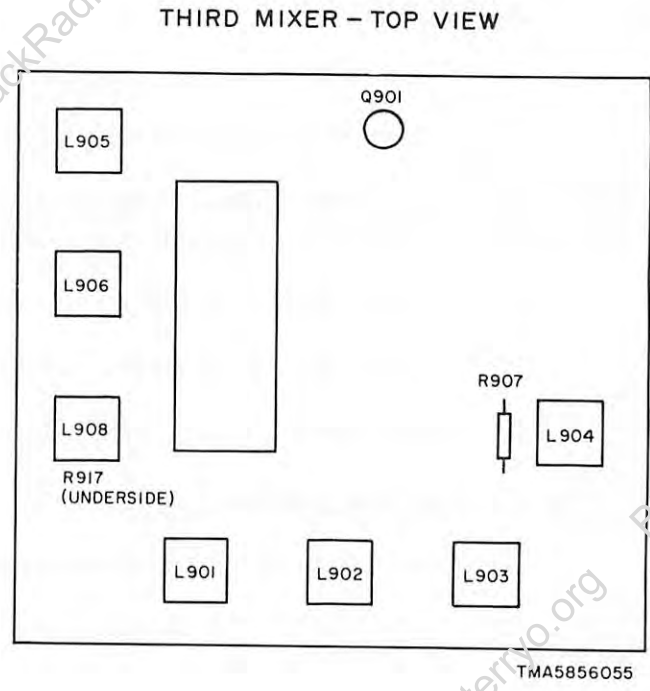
3RD MIXER ALIGNMENT PARTS LOCATION
